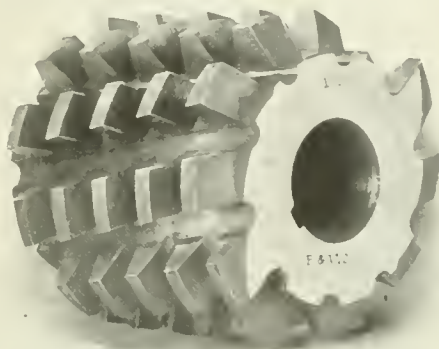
Hob that was relieved and ground on Angle of Thread with Pratt & Whitney Attachment
